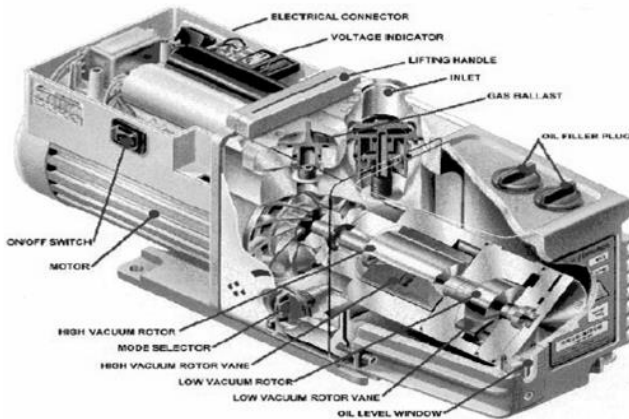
Pictures of parts and components of vacuum (EDWARD RV5)
